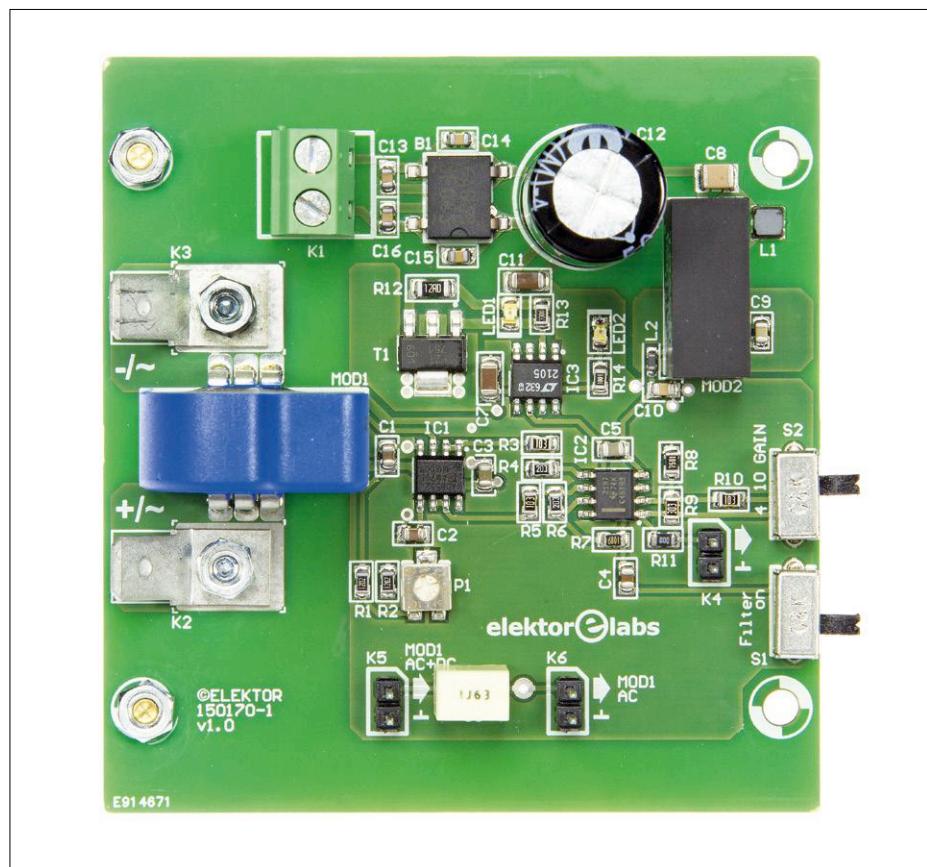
Component side of the PCB of the Elektor Labs prototype of the project.
